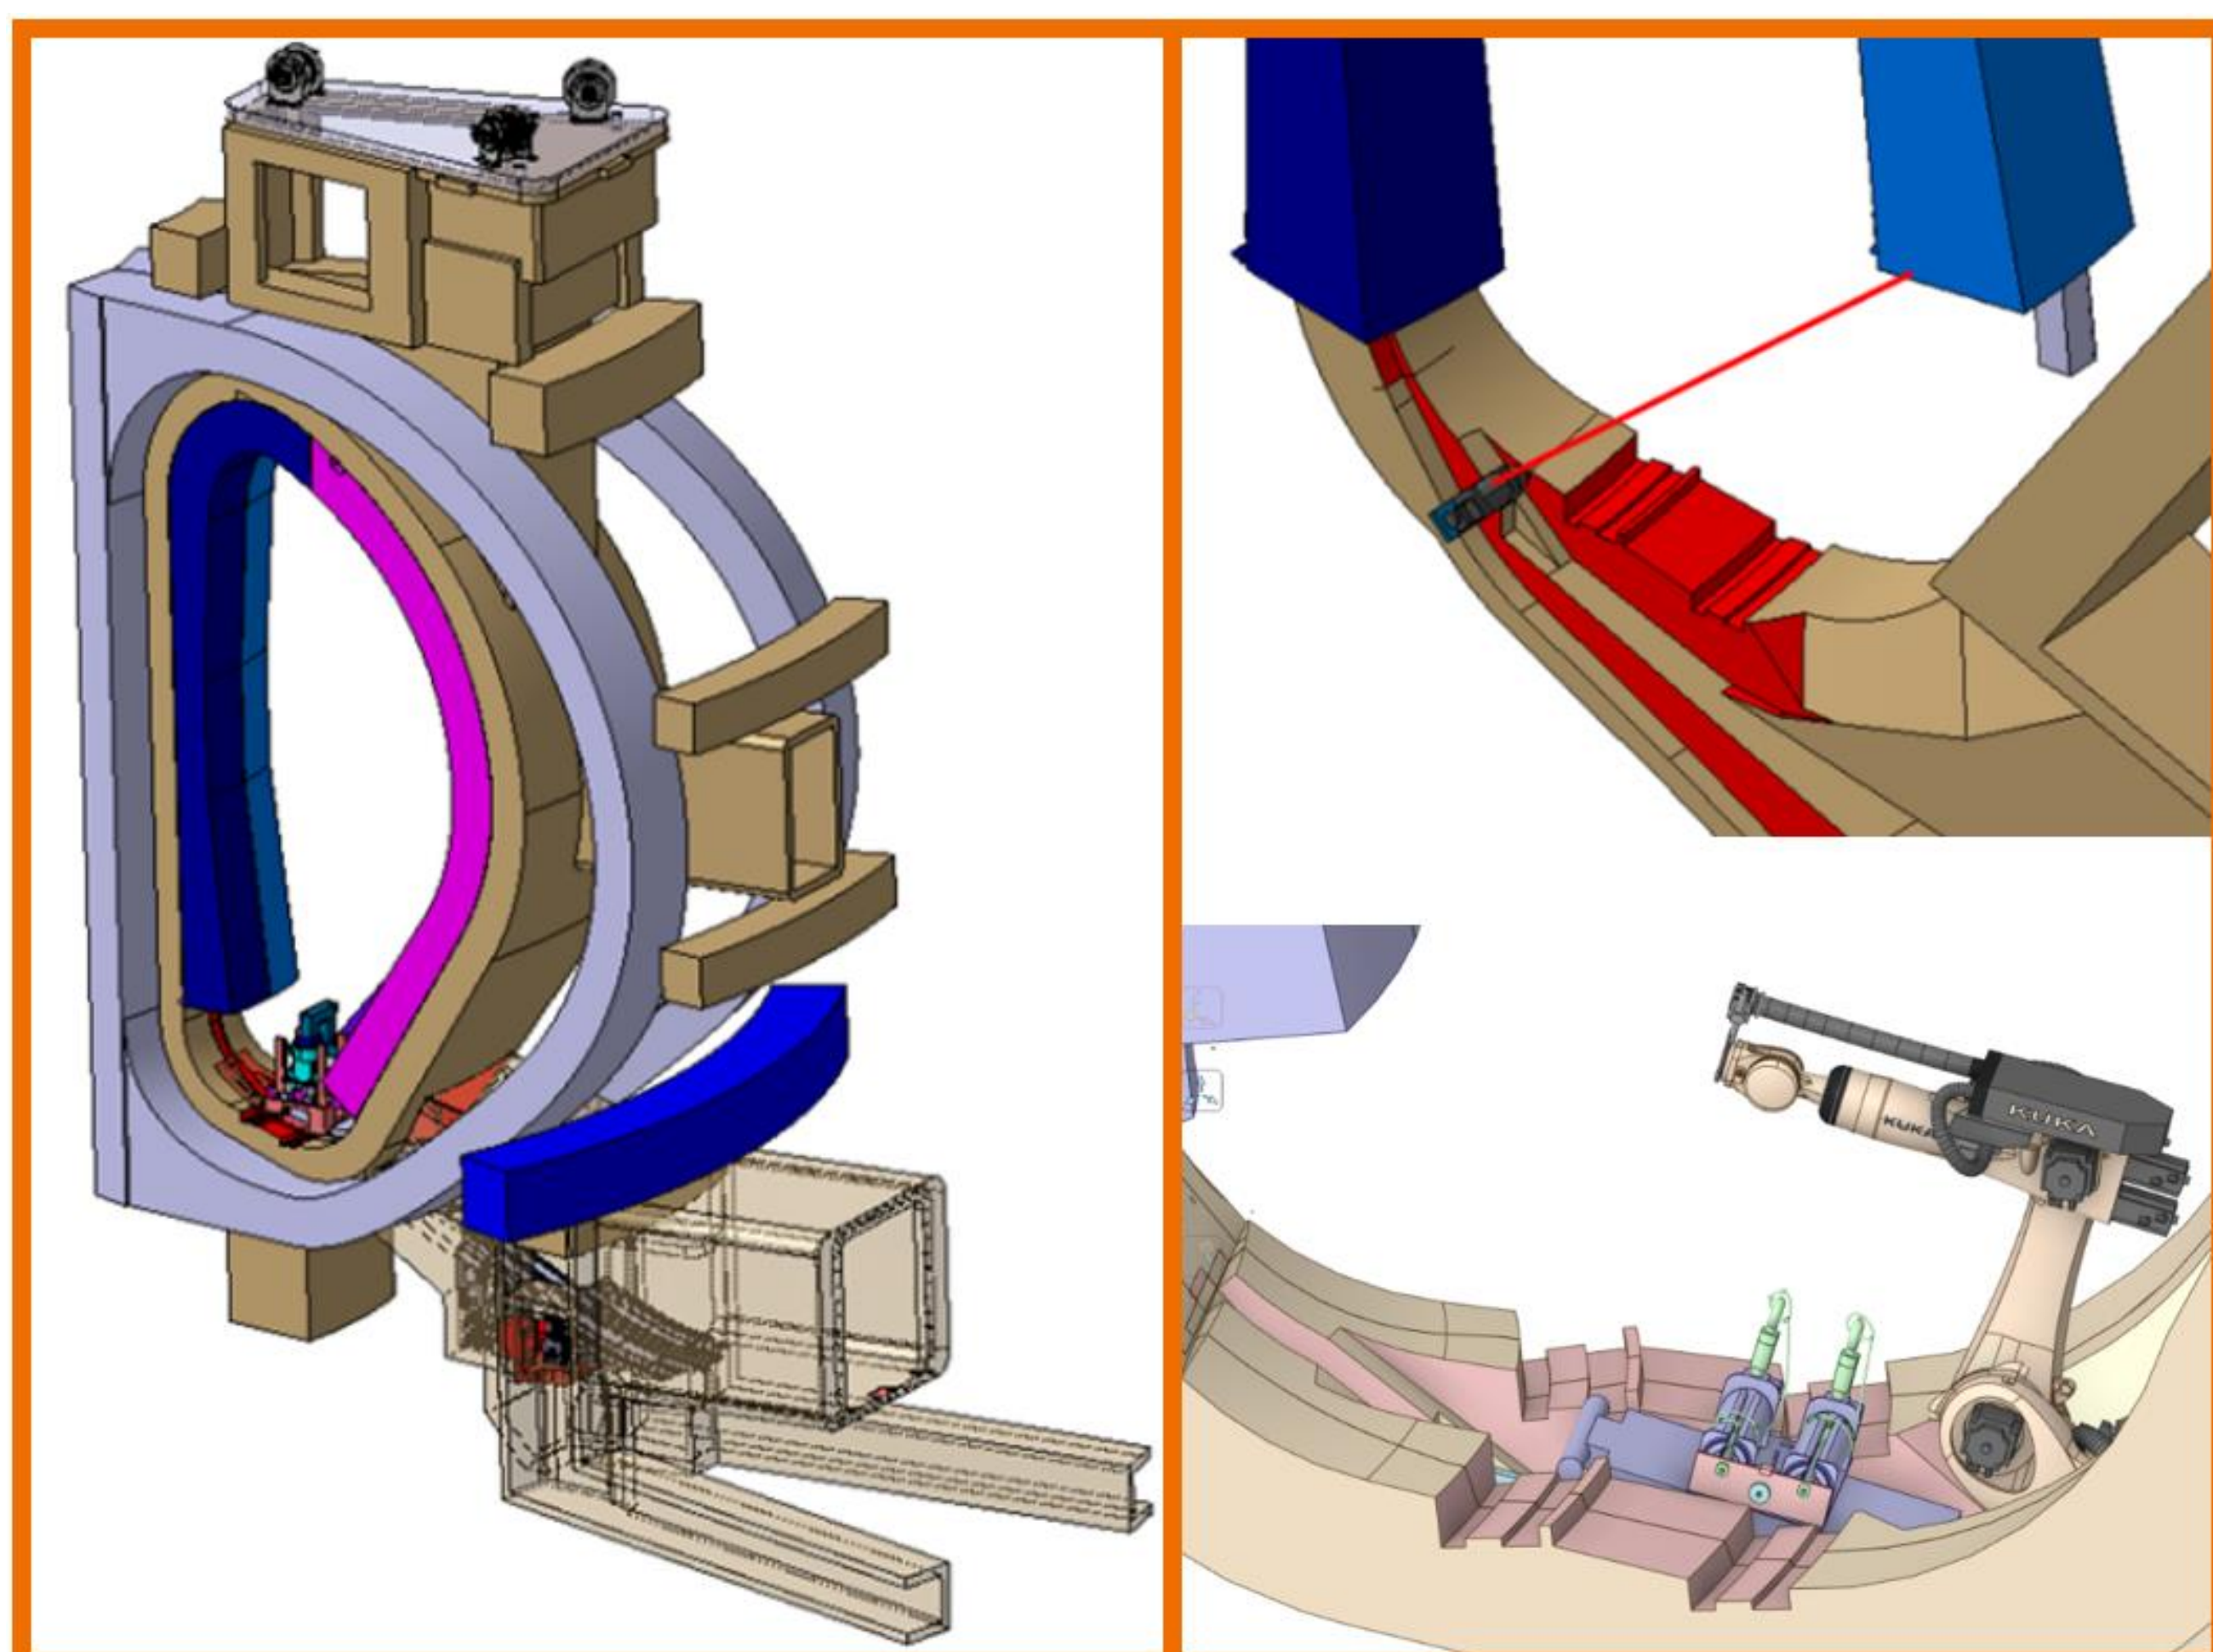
Left: Two-Port Mover (TPM) with Lower Manipulator System (LMS) and Upper Winch System (UWS); Top Right: Lower Port Winch (LPW) guiding In-Board Breeding Blanket (IBB); Lower Right: LPW deployed on a carriage and a manipulator for attaching IBB cable interfaces to the winch.
